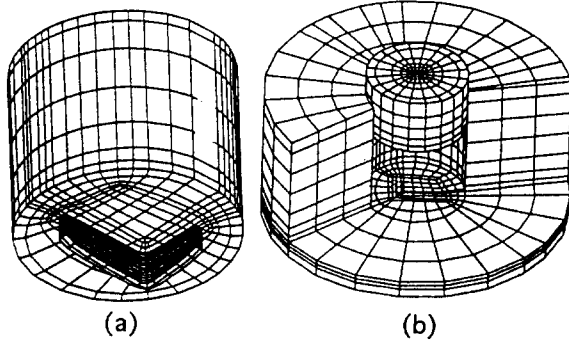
Mesh configuration of (a)workpiece and (b)tool
